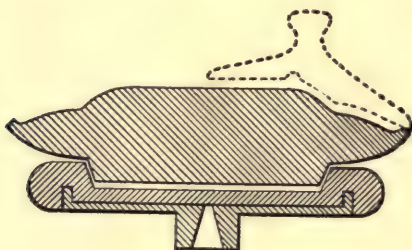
Wheel head with plate mold. The tool used is shown in dotted outline.
